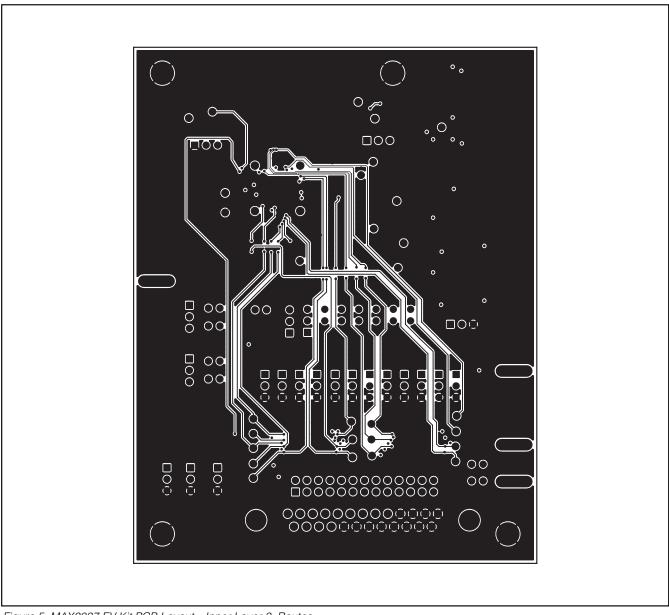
MAX2837 EV Kit PCB Layout—Inner Layer 3, Routes
